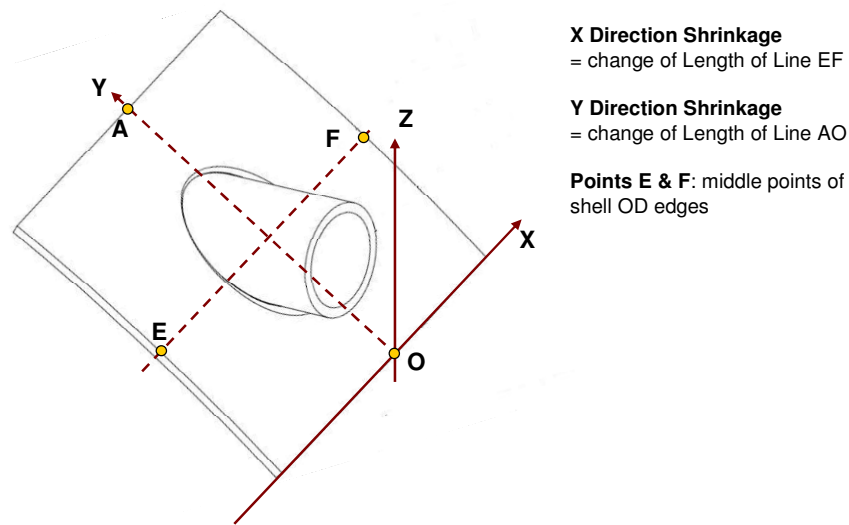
Definition of Plate Shrinkages in Single Nozzle Weld Mockup
